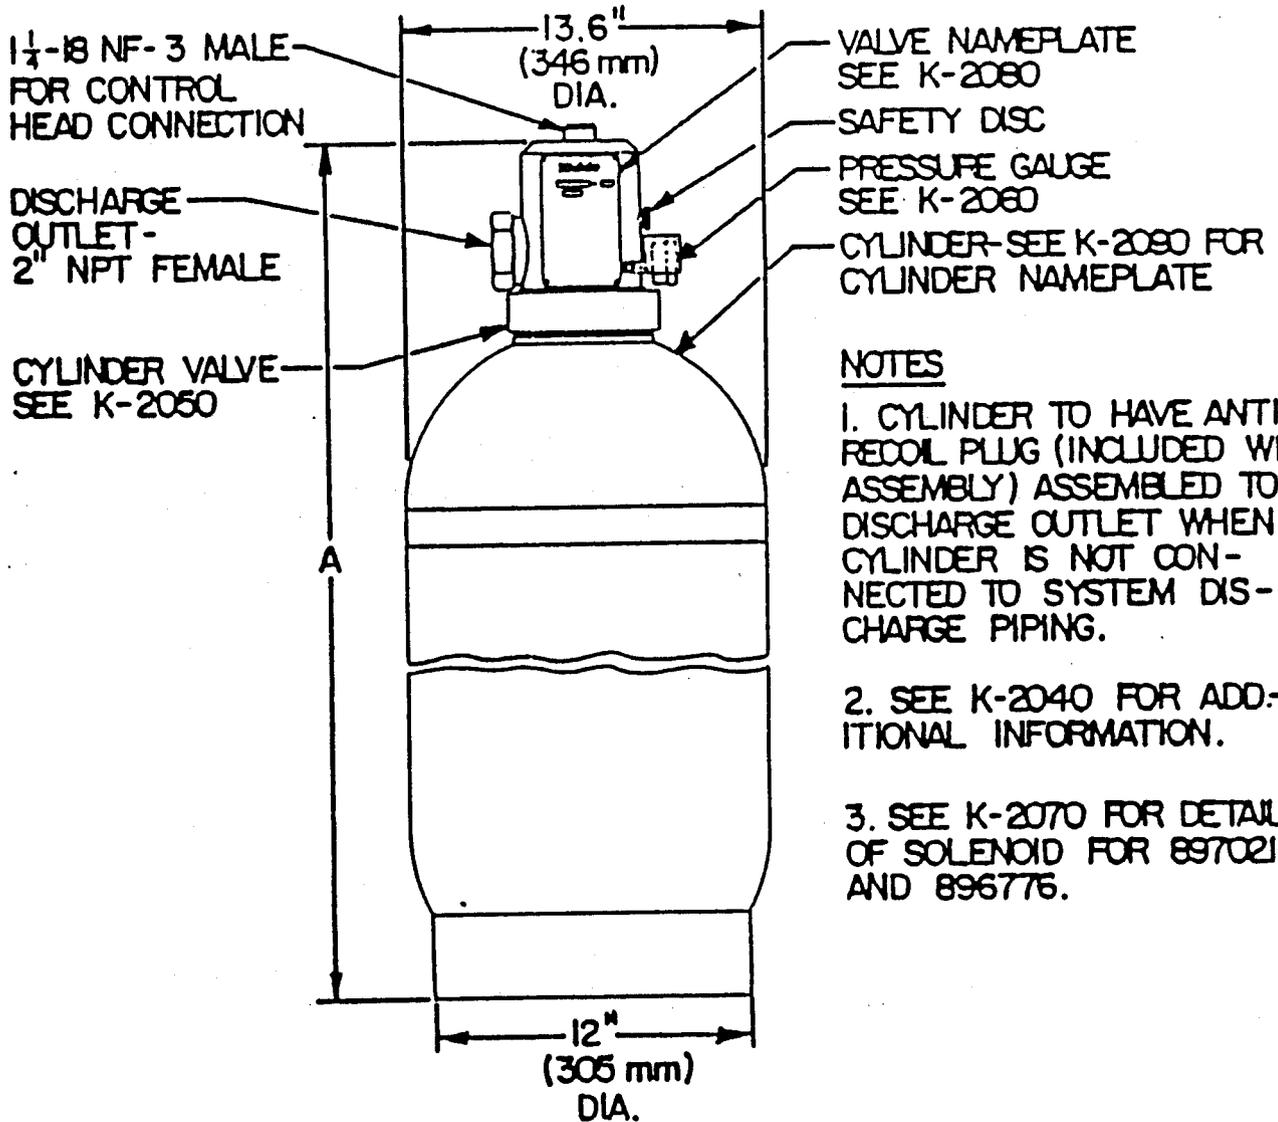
Halon 1301 Cylinder/Valve Assembly, 600 lb., without Liquid Level Indicator
